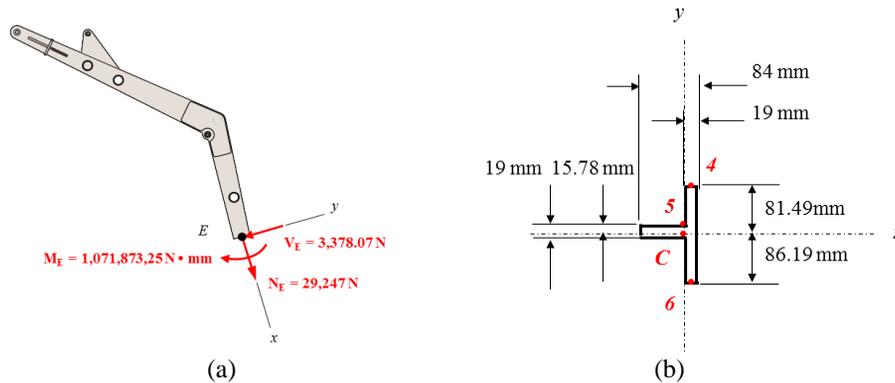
Cross-section E-E of loader arm, (a) forces acting on section, (b) Geometric section.
